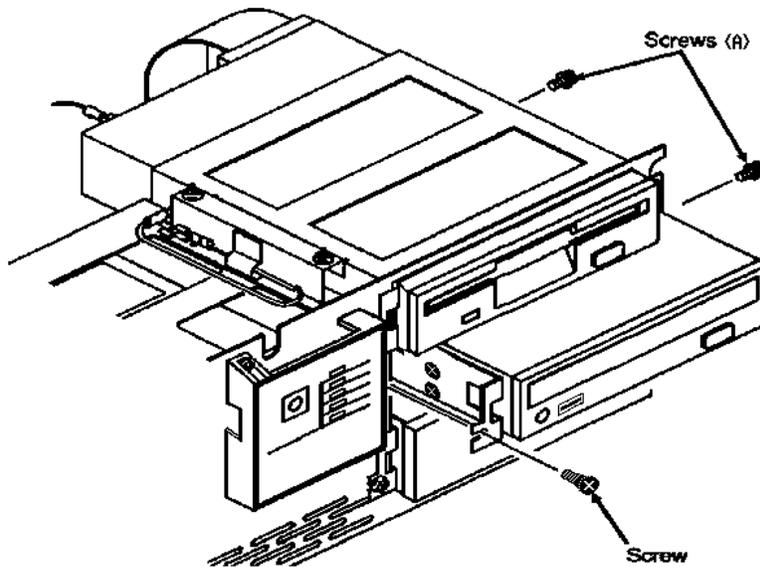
INSTALL CD-ROM IN PC CHASSIS
